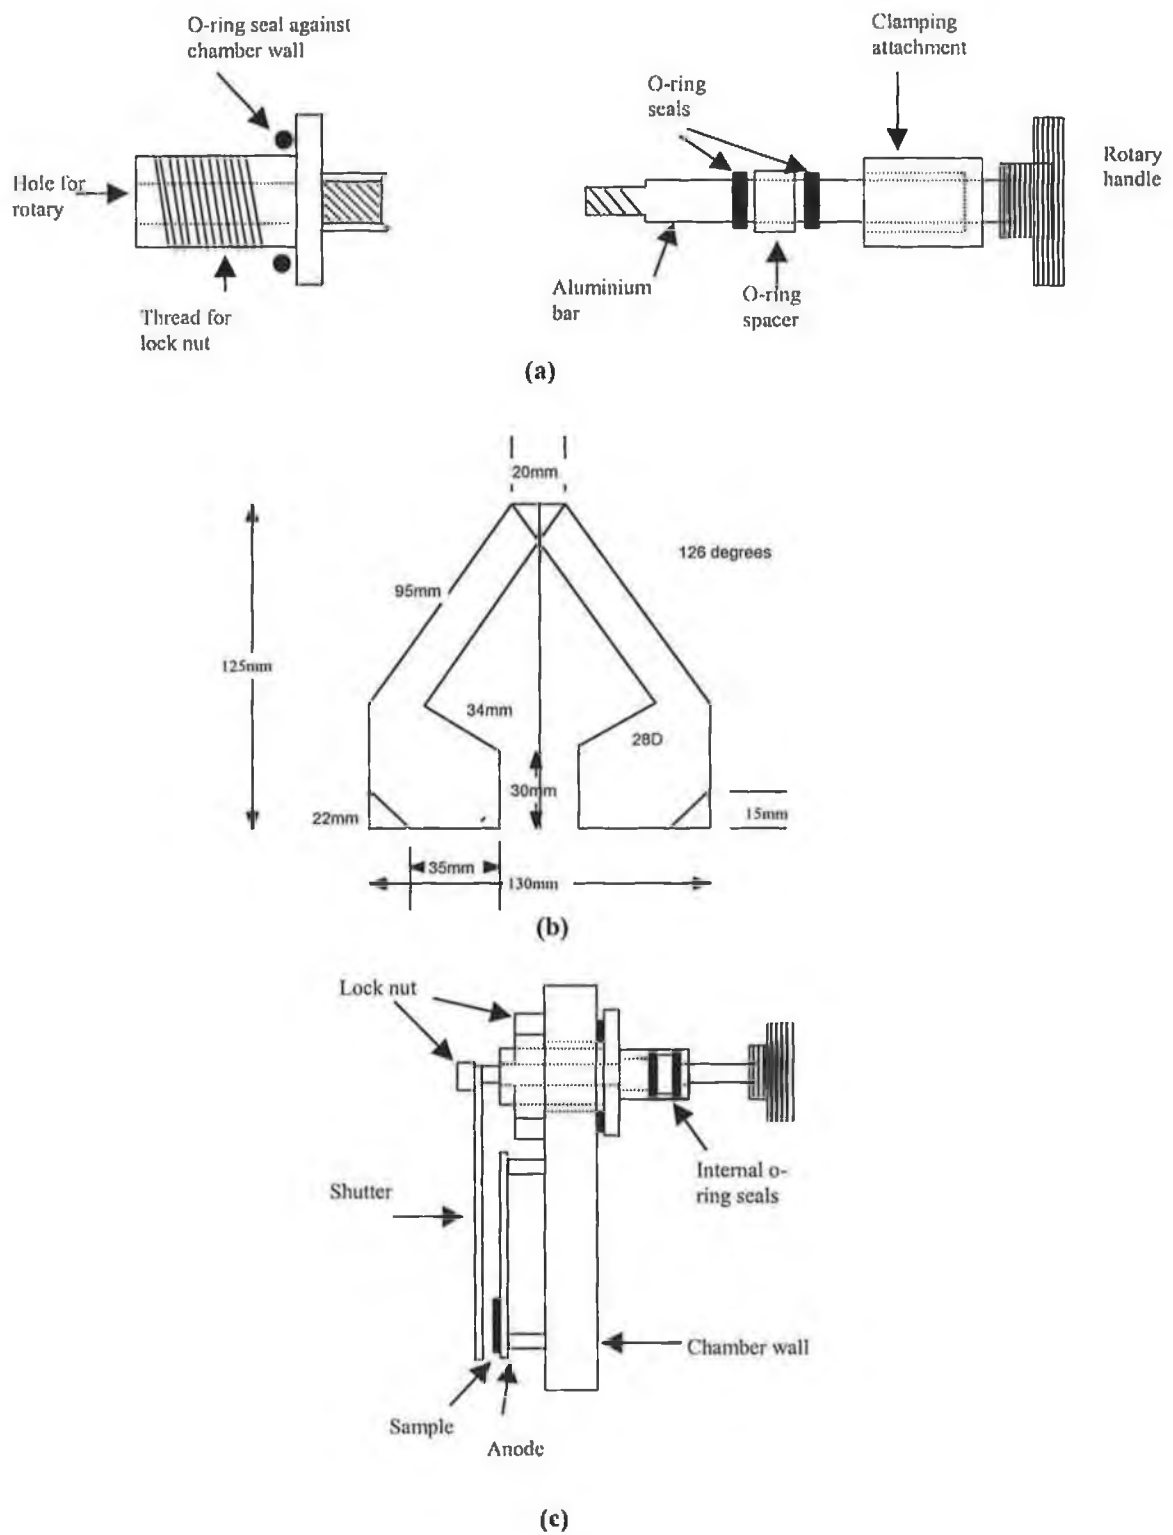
Schematic of the (a) rotary feed through, (b) shutter design and (c) the assembly of both in situ.
